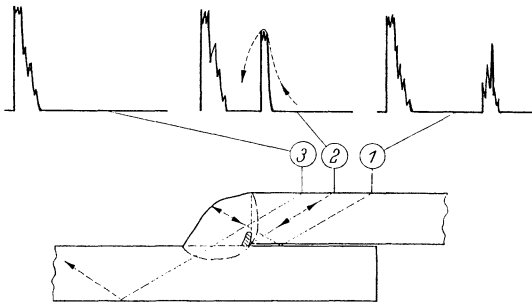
Testing a fillet-welded lap joint, or sleeve joint between two tubes (according to von Heesen)
